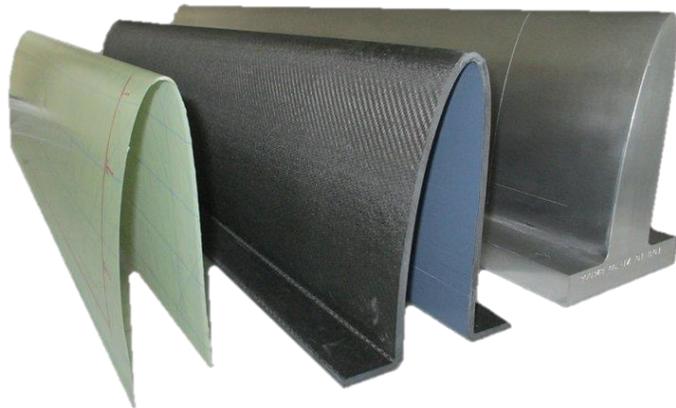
1st prototype part of the TUD-LE (l.); composite female mold (c.); aluminium mastermold for the morphing LE-elements in CHANGE (r.)
